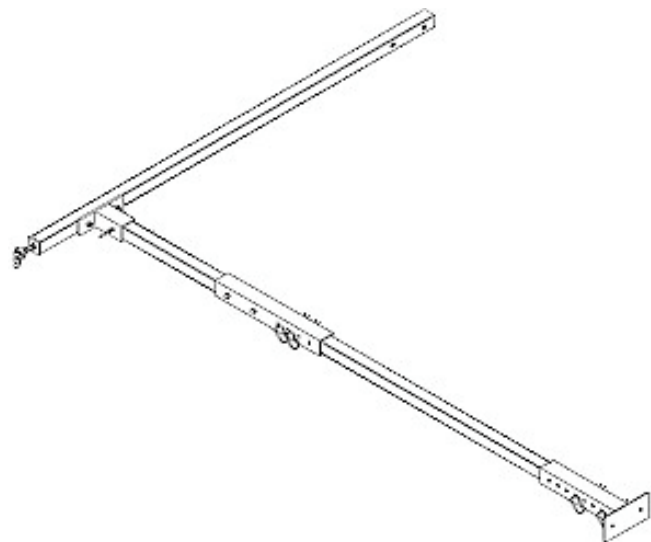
Header and Upright strut and footing connected with a hitch pin.
